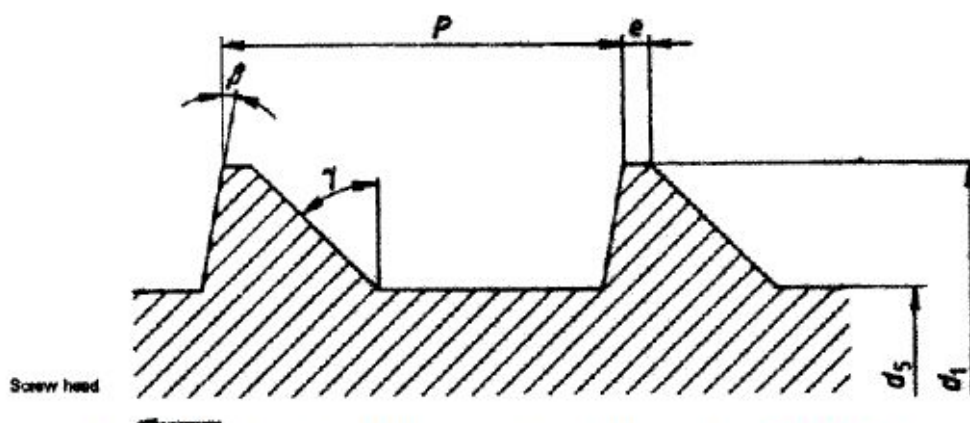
Schematic of HD Screw Thread Dimensions (Table A6.4)
